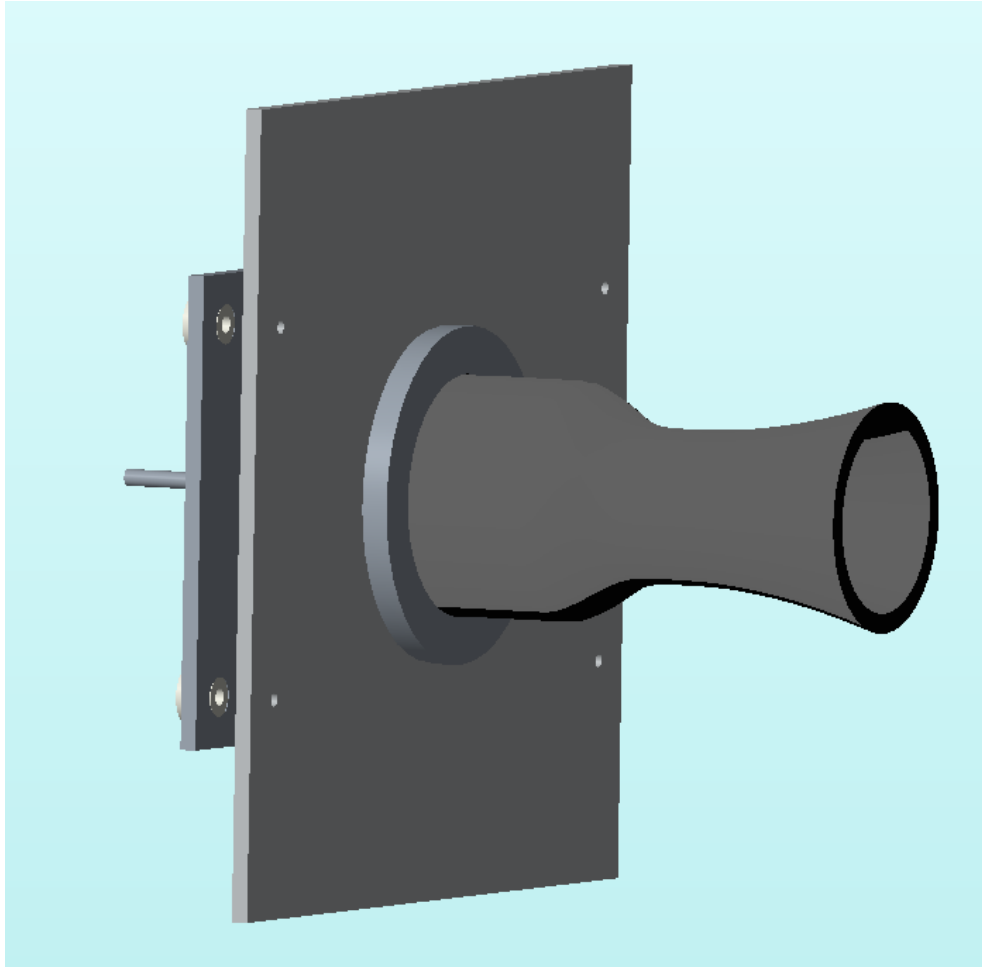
A CAD rendering of the thruster assembly build for testing the graphite OHC.
